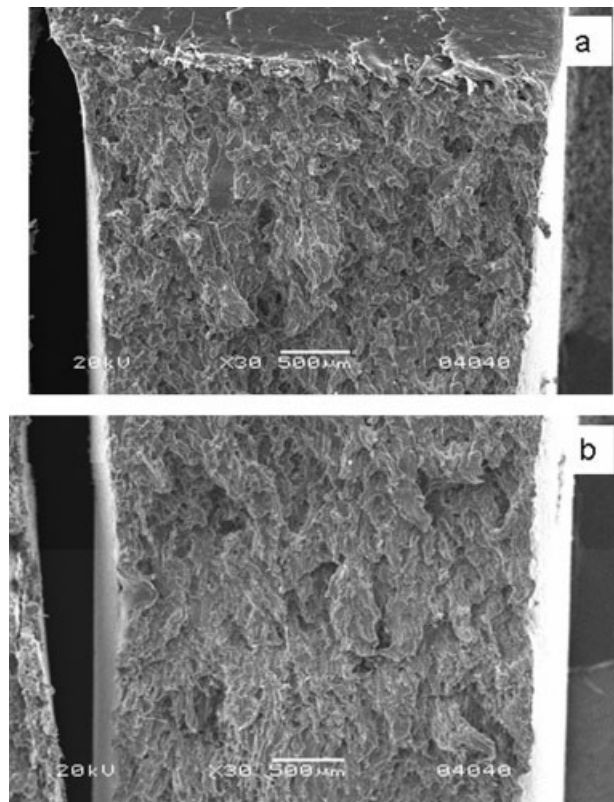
SEM images of impact fractured surface of injection-molded UPE/PP(80/20) blend (arrowed inside the pictures are cracks). (a) Near the notch tip (b) near the end of the fracture surface.
